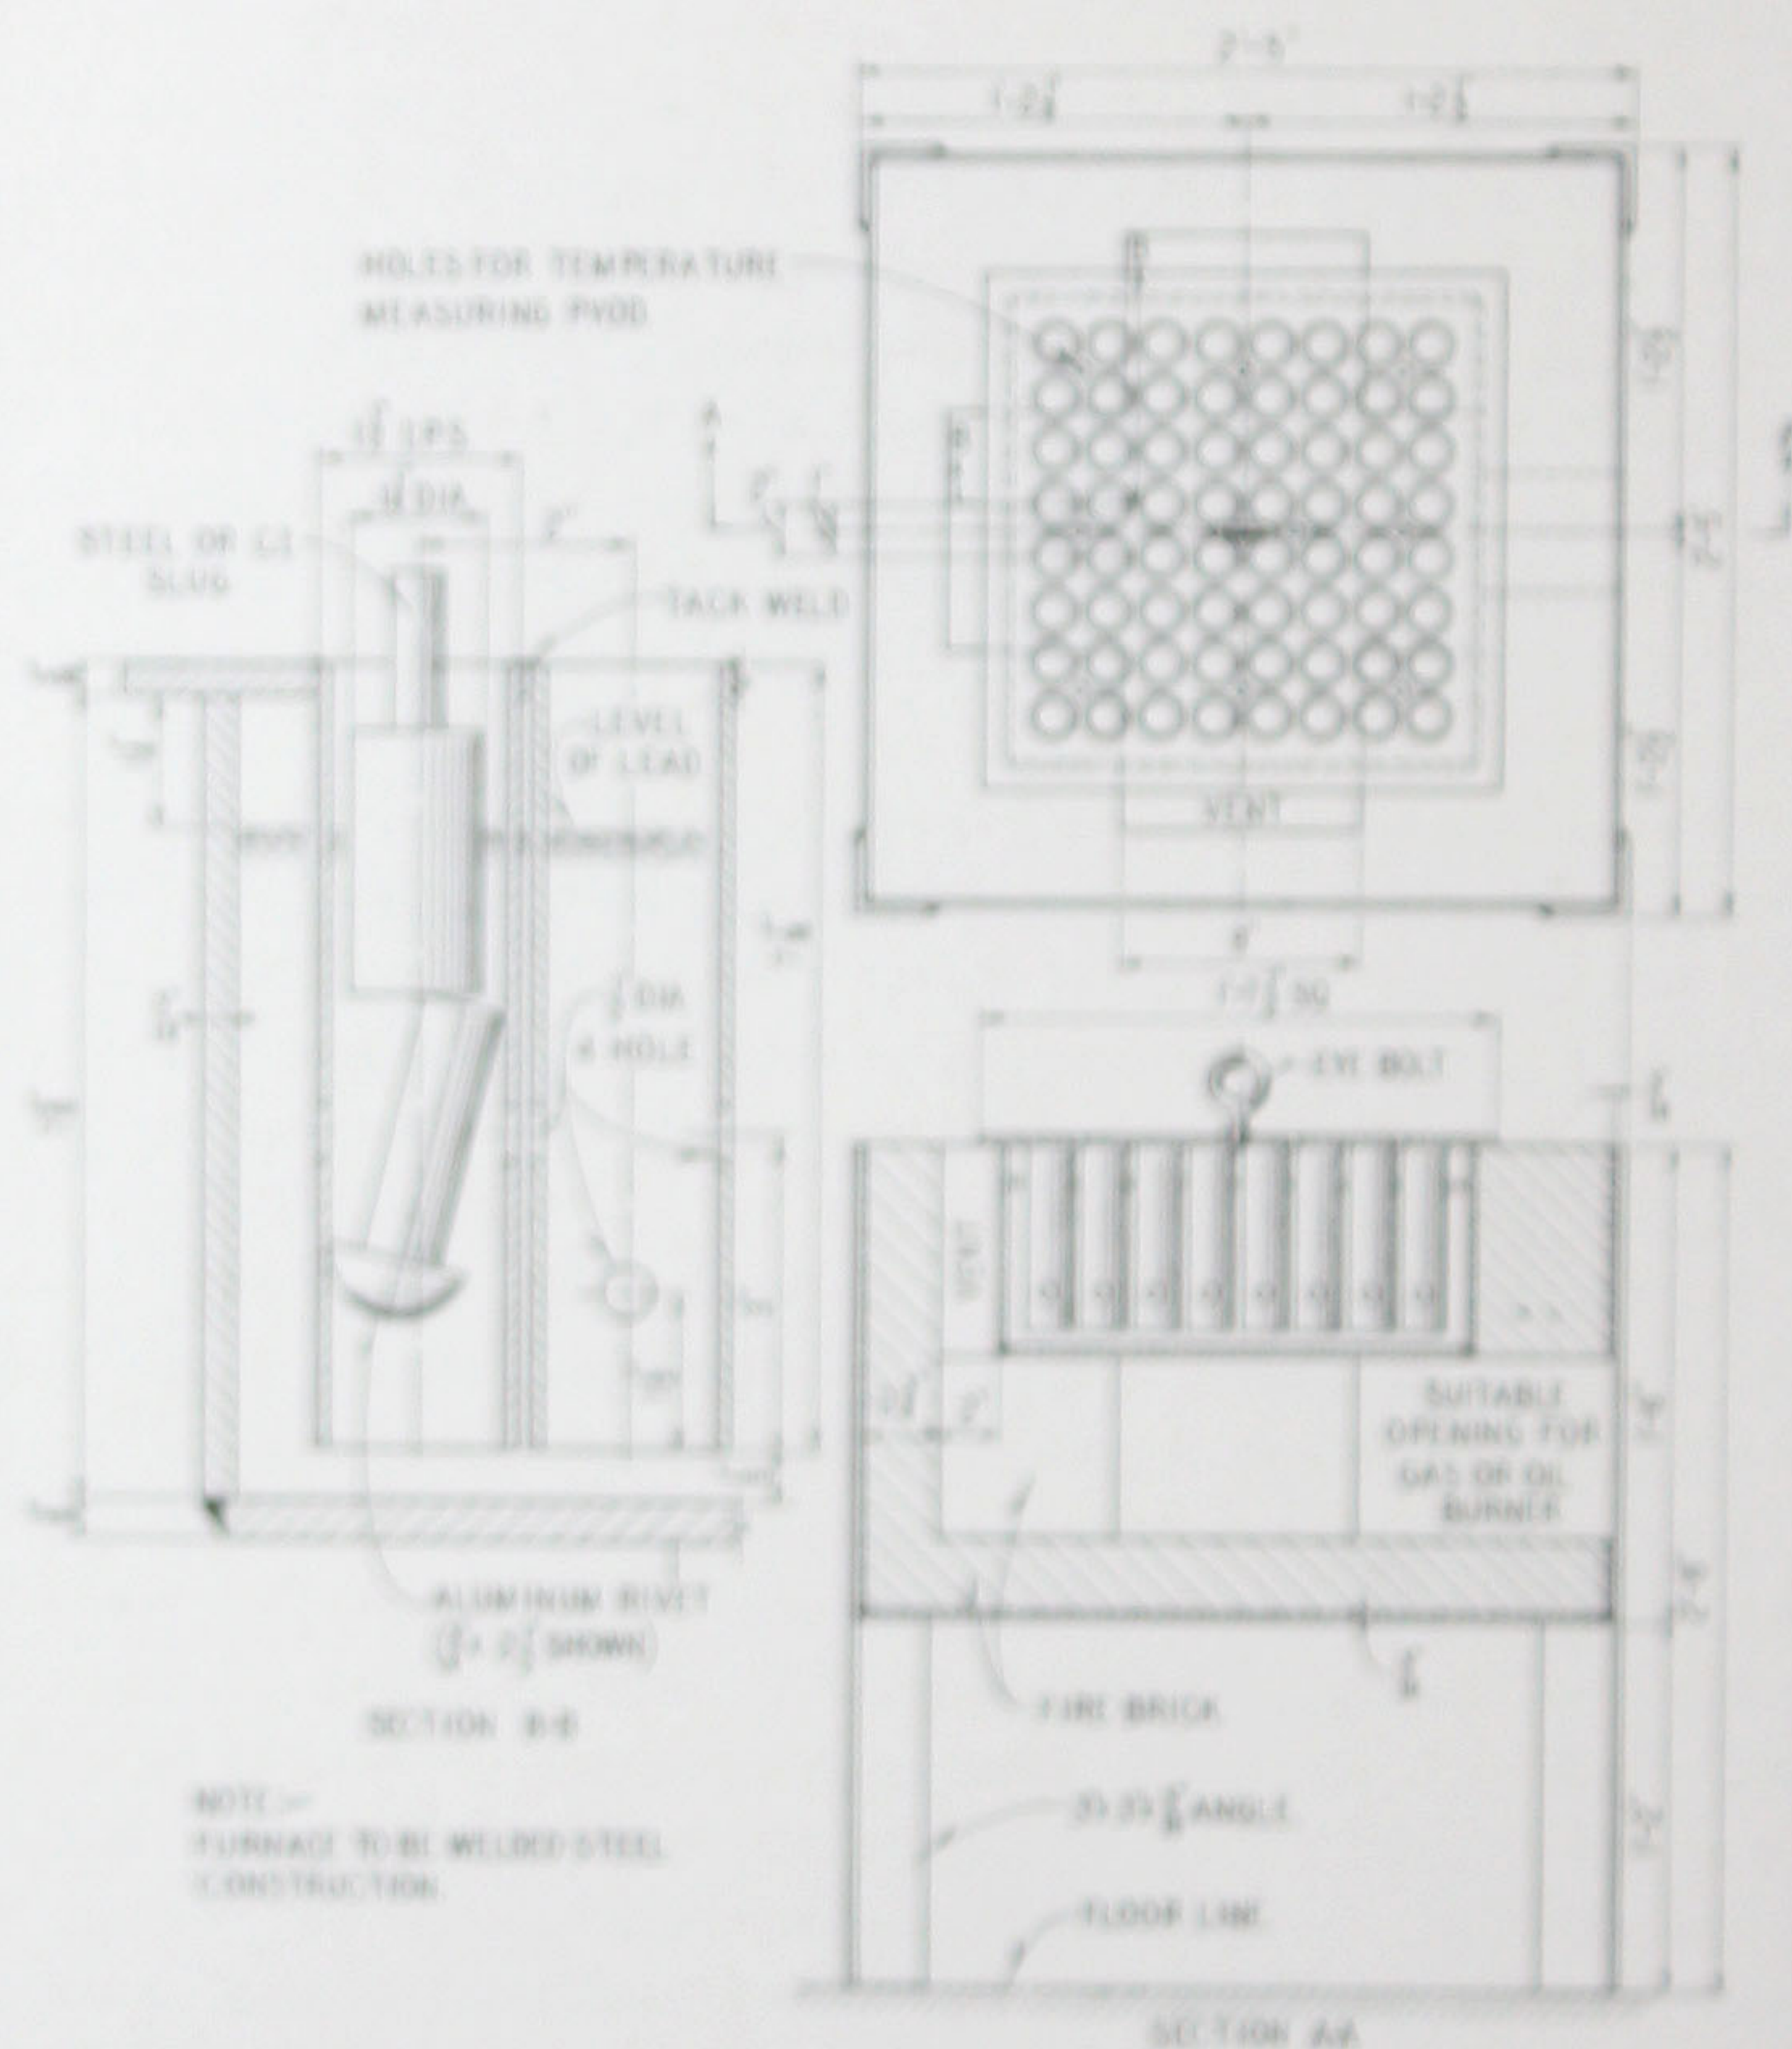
Lead pot for heating aluminum alloy rivets for hot driving.
